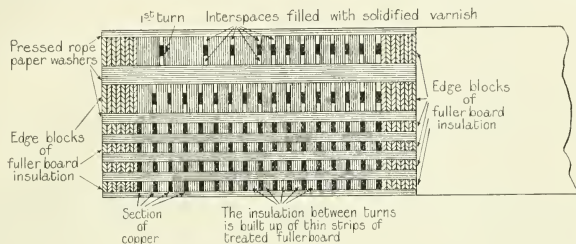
Section of Top Coil of a 60,000-volt Transformer.
